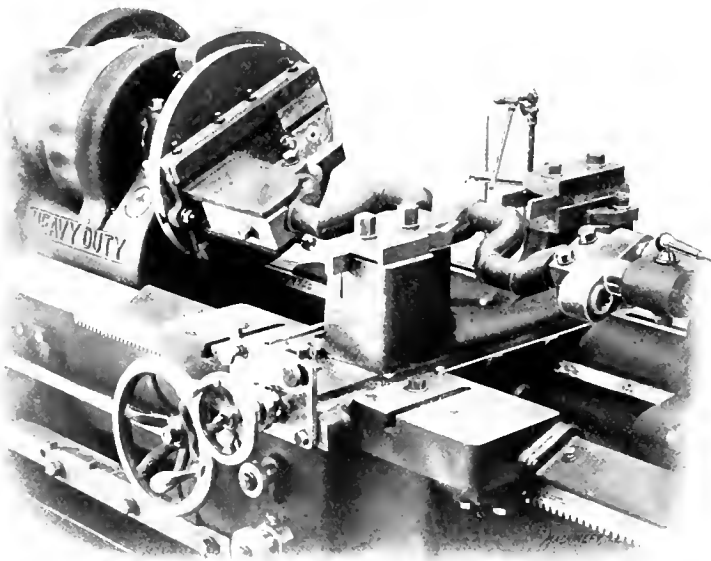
Detail View, showing Special Holding Device and Tool Stops
